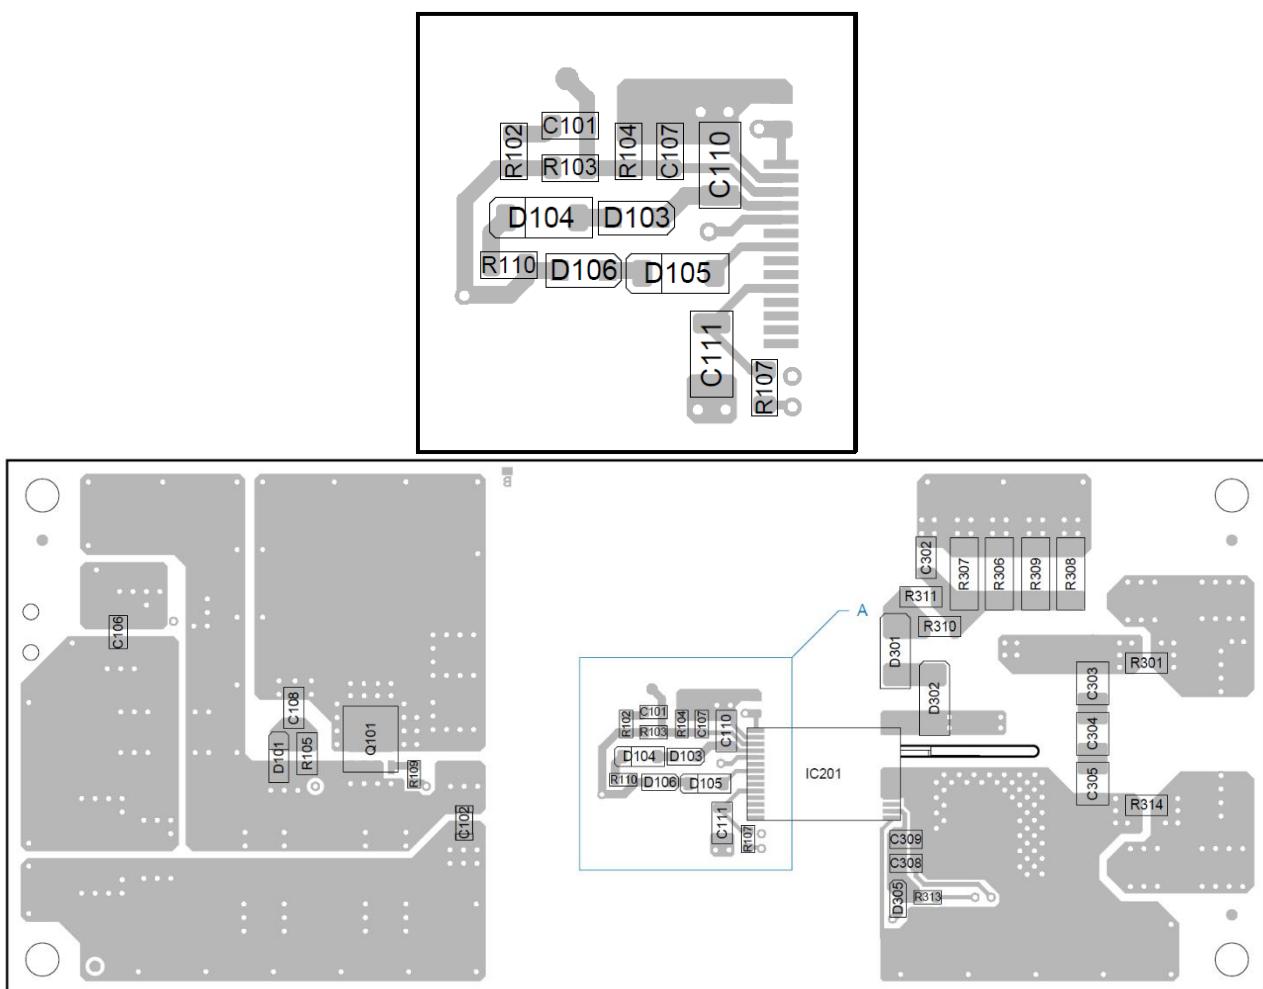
RDR-994Q PCB Assembly (Bottom)
